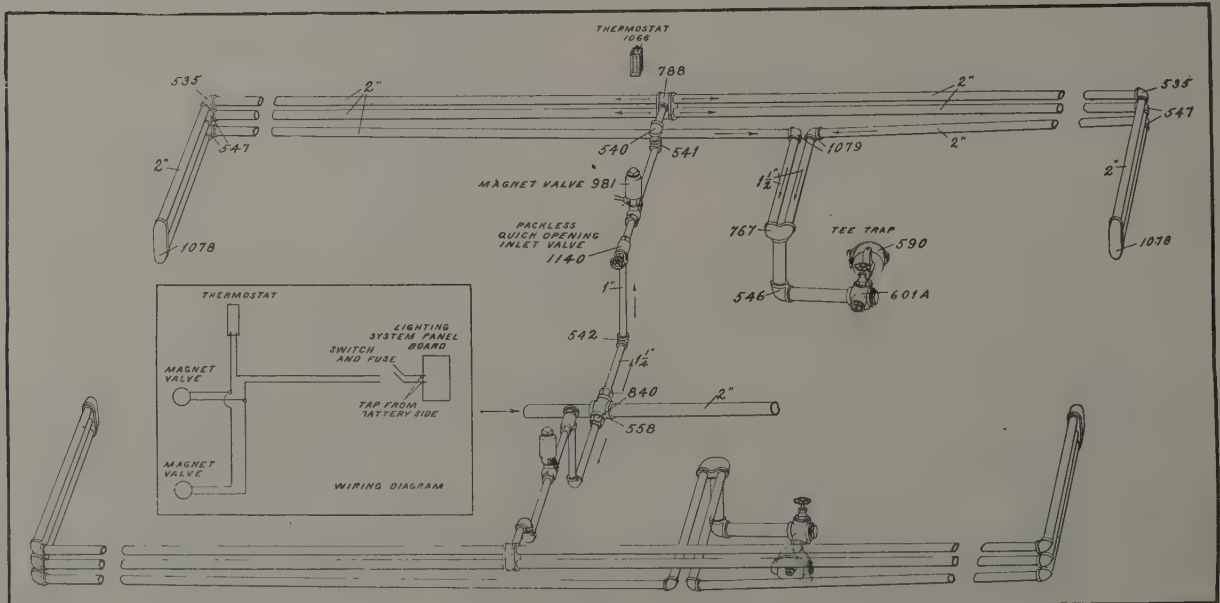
Gold Straight Steam System with Thermostatic Control for Steel Passenger Cars.
